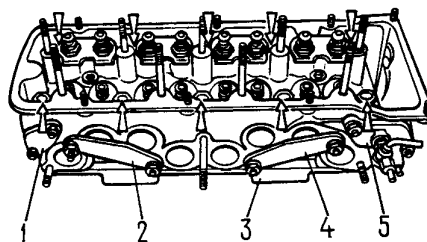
Checking Cylinder Head for Tightness on Tester A.60334:
